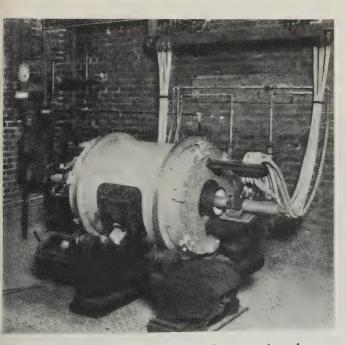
A rocking indirect arc electric melting furnace. This is a 350-lb 125-kw unit with friction drive through supporting rollers
